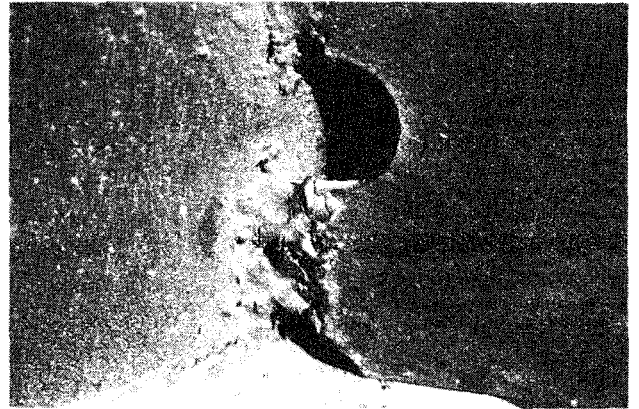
DETAIL OF CRACK IN WELD ON BOGIE
